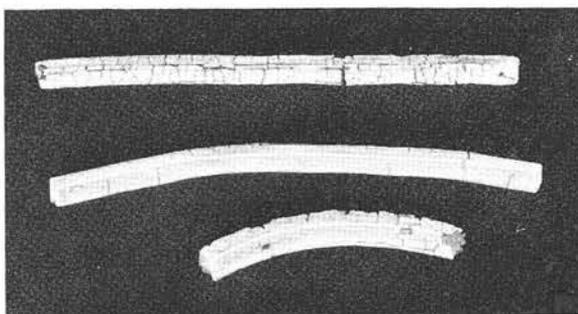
An exhibit from the investigations now being carried out by the Laboratories on aluminum and zinc-base alloy. Some test specimens showing corrosion and disintegration under exaggerated weathering tests
